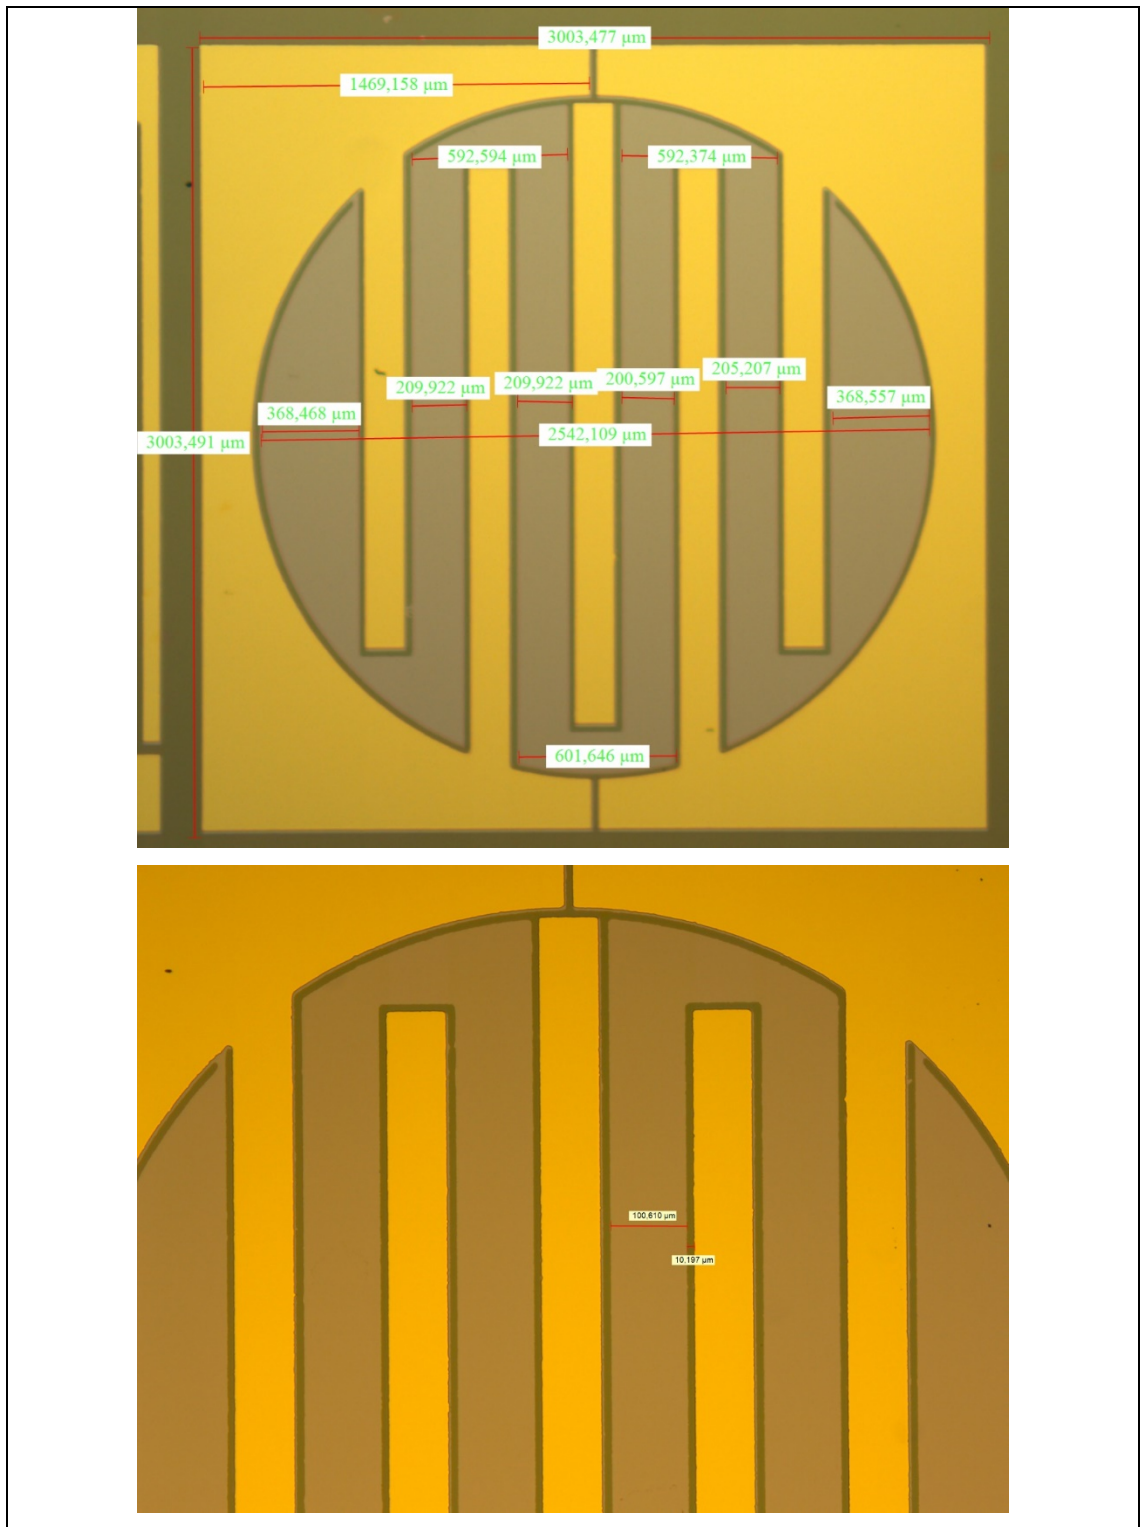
Dimension measurements of fabricated resistor with 20 μm line spaces using an optical microscope.
